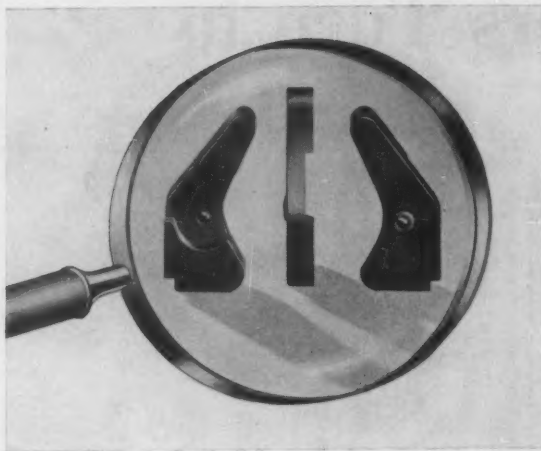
The contour, depression, boss, and center hole of these tripper flywheels for a camera shutter are formed in a pressing operation.
